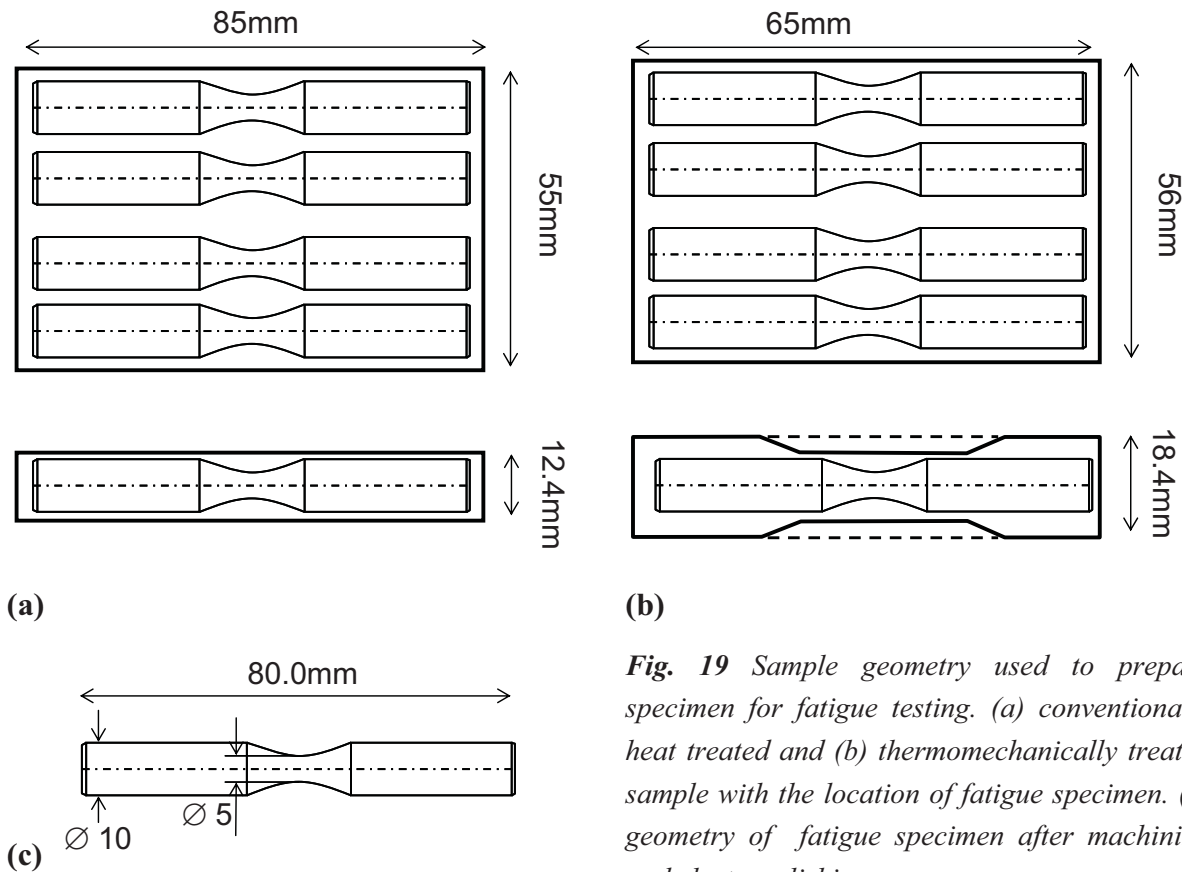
Sample geometry used to prepare specimen for fatigue testing. (a) conventionally heat treated and (b) thermomechanically treated sample with the location of fatigue specimen. (c) geometry of fatigue specimen after machining and electropolishing.
